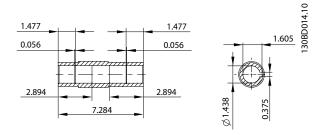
Stainless Steel 1 7/16 inch shaft
